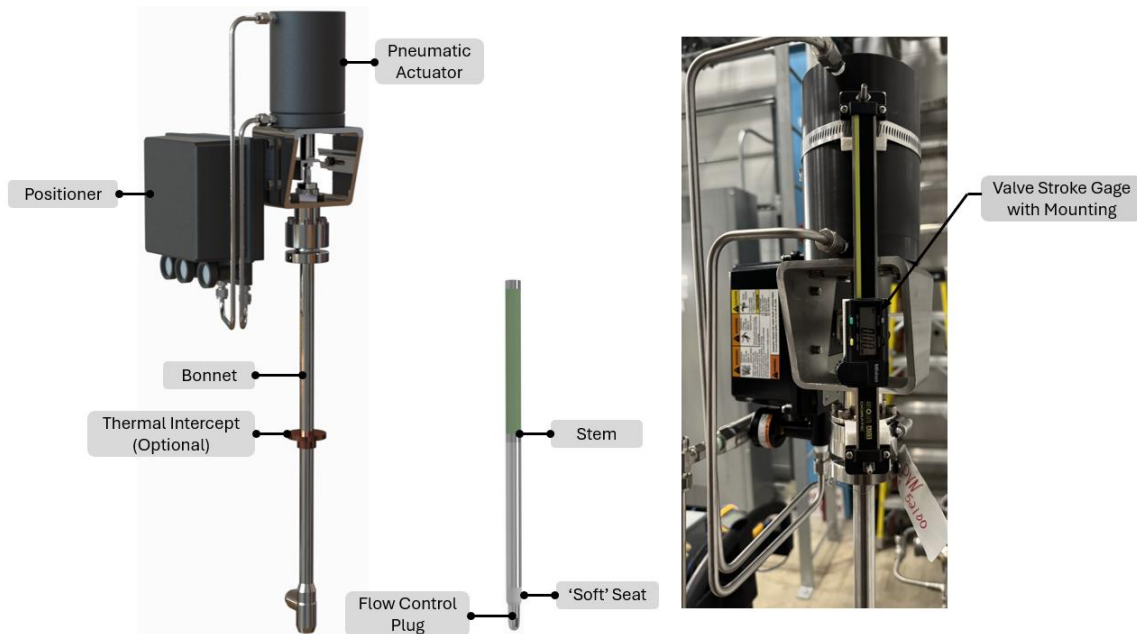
Typical cryogenic valve with a pneumatic actuator (left), elongated valve stem and flow control plug (center), and valve stroke gage mounted on the actuator (right).
